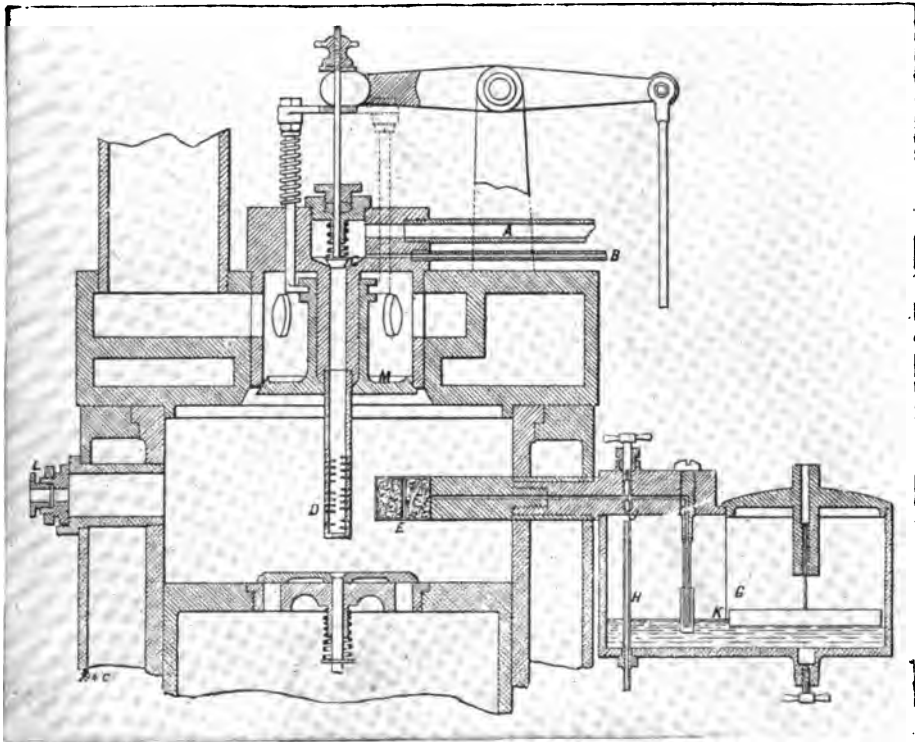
SECTIONAL VIEW OF BRAYTON ENGINE.
